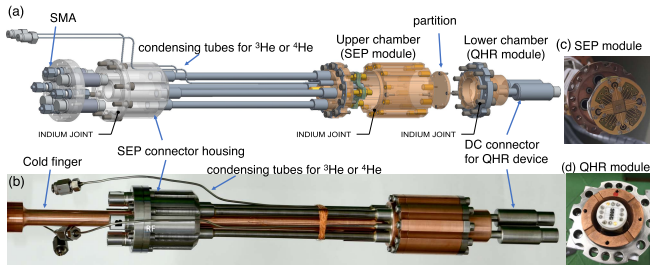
(a) Drawing and (b) photograph of the SC [4]. (c) Bottom view of the SEP module with a PCB. (d) Top view of the QHR module. The QHR carrier is made of alumina ceramic (white colored part) and is plugged into the receptacle PCB.
